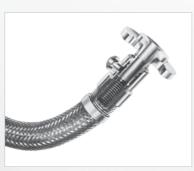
Cross-sectional view of a HYDRA double hose assembly.
